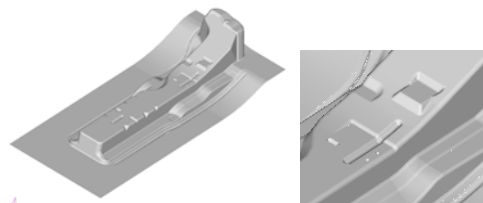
CAD model of the modified tool surface for the stamping of the front side member inner.
